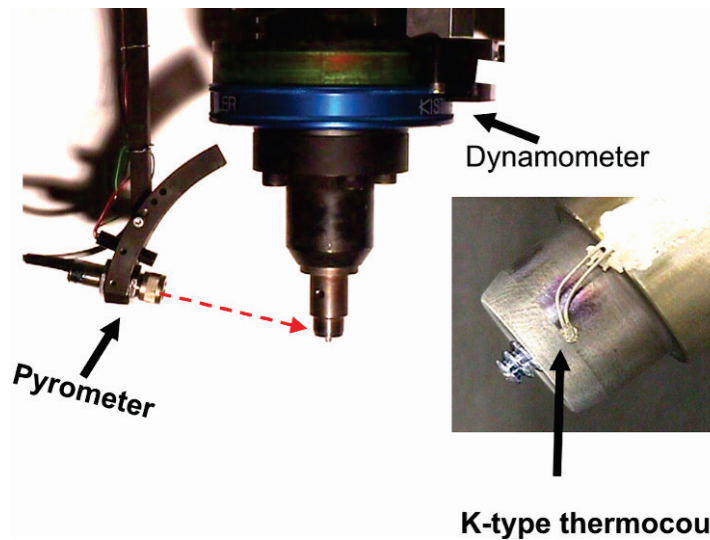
Welding head equipped with dynamometer and thermocouples for temperature and process loads data acquisition
